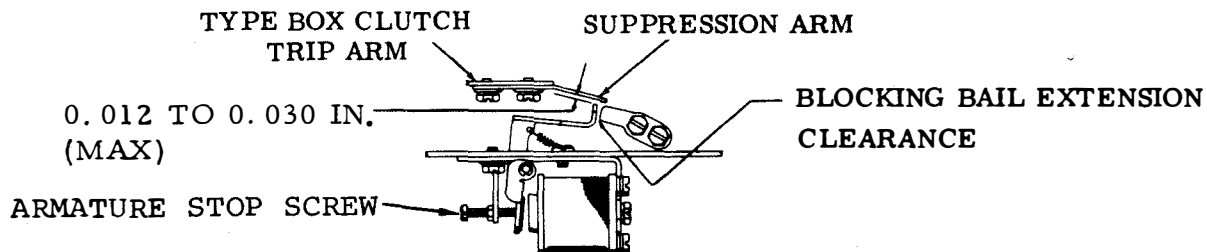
Armature Extension Clearance and Blocking Bail Extension Clearance, Left Side View
